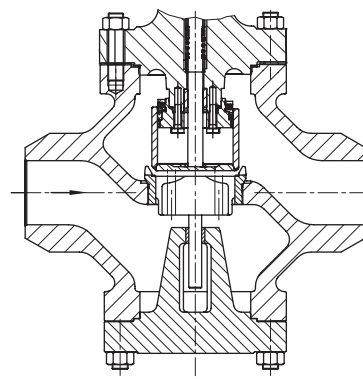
Type 3254 Valve with welding ends and balanced plug
